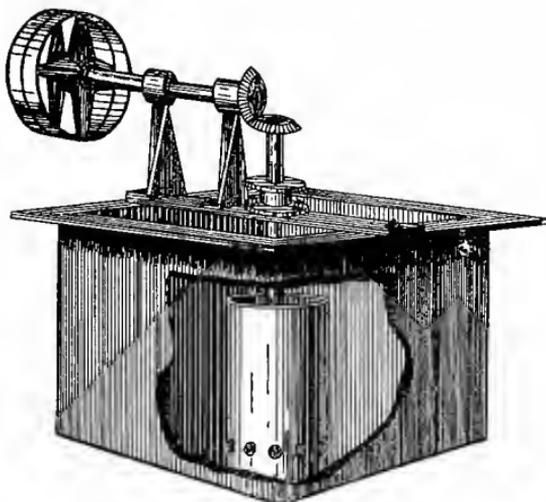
Perspective view of vessel represented in Fig. 3.
